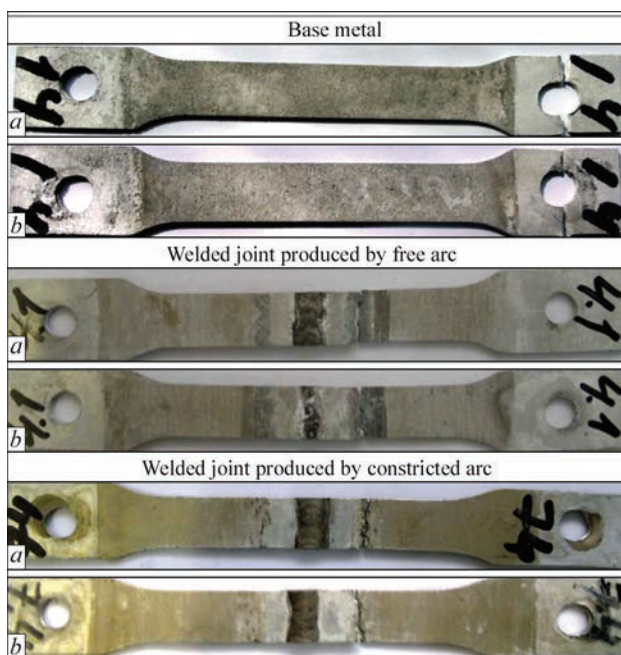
Appearance of specimens of base metal and welded joints of B1341T alloy, produced by free and constricted arc after tests on resistance to corrosion cracking: a — facial surface; b — back surface
